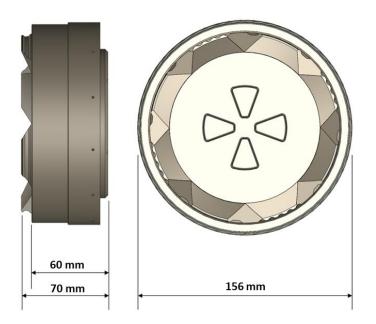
HOTDOCK - Side and Top view with basic dimensions
